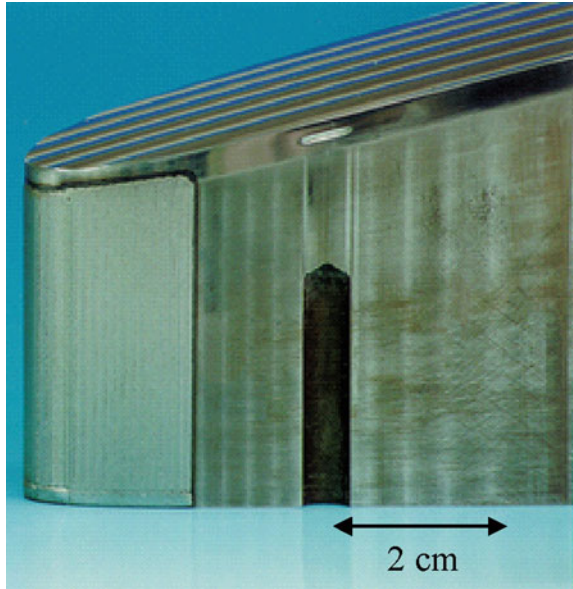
Modification of an injection mold for a car lamp housing (material: hot working steel) [5]
